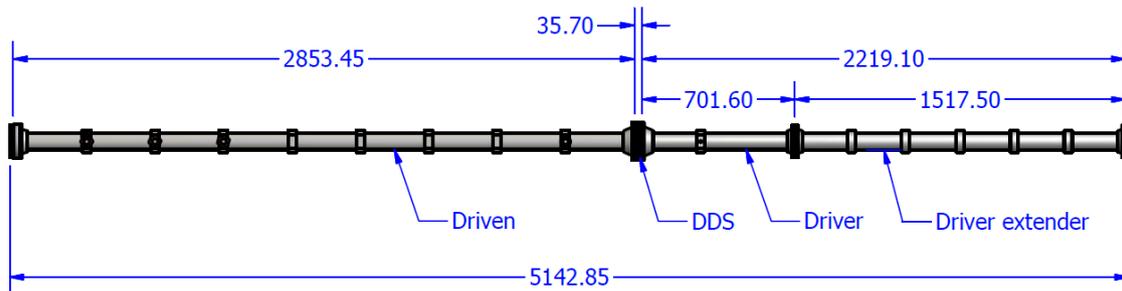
Dimensions of shock tube T1 (in mm), with the driver extender
